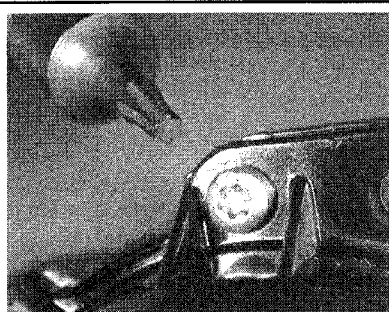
You'll need a T-10 or T-15 Torx® head driver to remove the housing cover screws
